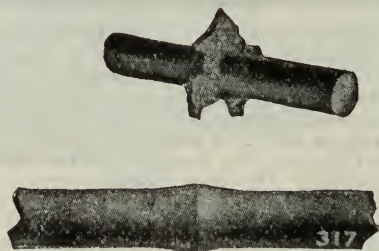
,508 to 4,516.—General hints on electric welding. Cast iron cannot be commercially welded, as it is high in carbon and silicon, and passes suddenly from a crystalline to a fluid condition when brought up to the welding temperature. Iron or steel. It is necessary to keep the temperature below the melting point to avoid injury to the metal, and consequently considerable pressure is required to make the weld. The stock should be placed in the dies as shown in fig. 4,508 for a flash weld, and as shown in fig. 4,509 for an upset weld, A representing the dies, and B, the stock to be welded. High carbon steel can be welded, but must be annealed after welding to overcome the strains set up by the heat being applied locally at one place. Good commercial results are hard to obtain when the carbon runs as high as point 75 or above, and can only be done by an experienced operator. When below point 25, the operator can always be sure of making a good weld. To weld high carbon steel to low carbon steel, the stock should be clamped in the dies as shown in fig. 4,510, with the low carbon stock extending considerably further out from the dies than the high carbon stock. Nickel steel. This welds readily, and a small percentage of nickel materially increases the tensile strength of the metal. Iron to copper. These metals can be welded to each other, but it will be found necessary to reduce the cross section of the copper as shown in fig. 4,511. Copper and brass. When welding copper and brass the pressure must be less than when welding iron. The metal is allowed to actually fuse or melt at the juncture, and the pressure should only be sufficient to force out the burnt metal. This burnt portion being forced out, accounts for the good results obtained in welding these metals. The current must be cut off the instant the ends of the metal begin to soften. This is done by using an automatic switch which opens at any predetermined point. The sliding head is actuated by either a spring or weight to force the heads together as soon as the metal softens, and this automatically operates the switch. As copper and brass are good conductors of the electric current, a larger volume of current at lower secondary voltage is used and the sliding heads are arranged to move with the least possible friction. The dies should be set apart approximately three times the diameter of the stock for brass and four for copper. See figs 4,512 and 4,513. A represents the dies, and B, the stock to be welded. The welds when properly made will stand the strain of the rolling or drawing process to reduce them to a smaller size. Spot welding. To weld two pieces of sheet steel at one small place or spot is called spot welding. For convenience of handling the stock this is usually done in a machine with vertical clamping dies. Where the size and shape of the pieces to be welded will admit, the work can be done in a butt welder equally as well. In this case one of the dies is slightly pointed and the stock welded between the dies as shown in fig. 4,514. Another way is shown by fig. 4,515, where two pieces of copper rod C, one of them slightly pointed, are clamped in the dies A. If galvanized iron is to be welded it will be found necessary to use two pointed dies instead of one flat and one pointed. Jump welding. This is for light stock only and the best results are obtained by slightly pointing one of the pieces as shown in fig. 4,516. The other piece is held with a portion extending outside the die, then bring them together, turn on the current and weld quickly.
